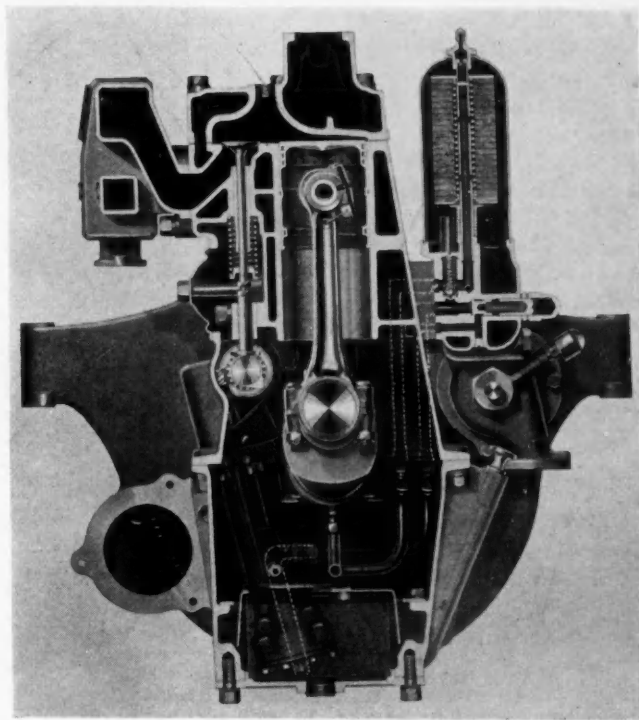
HERCULES ENGINE, SHOWING AMPLE VALVE-COOLING
